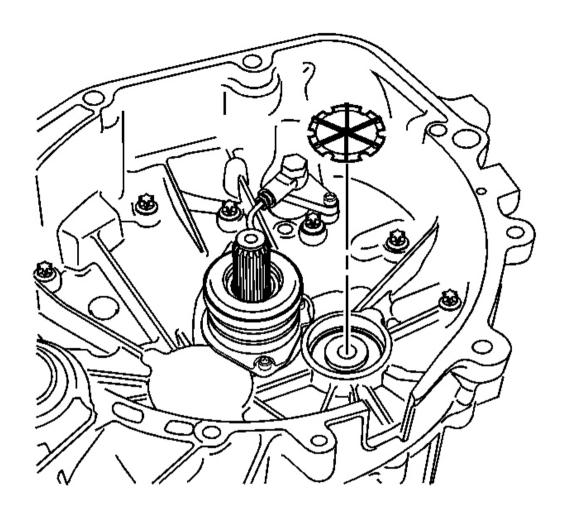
Identifying Plastic Oil Guide Courtesy of GENERAL MOTORS CORP.
